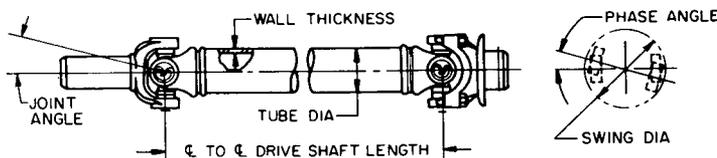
ONE-PIECE TUBULAR DRIVE SHAFT TERMINOLOGY
